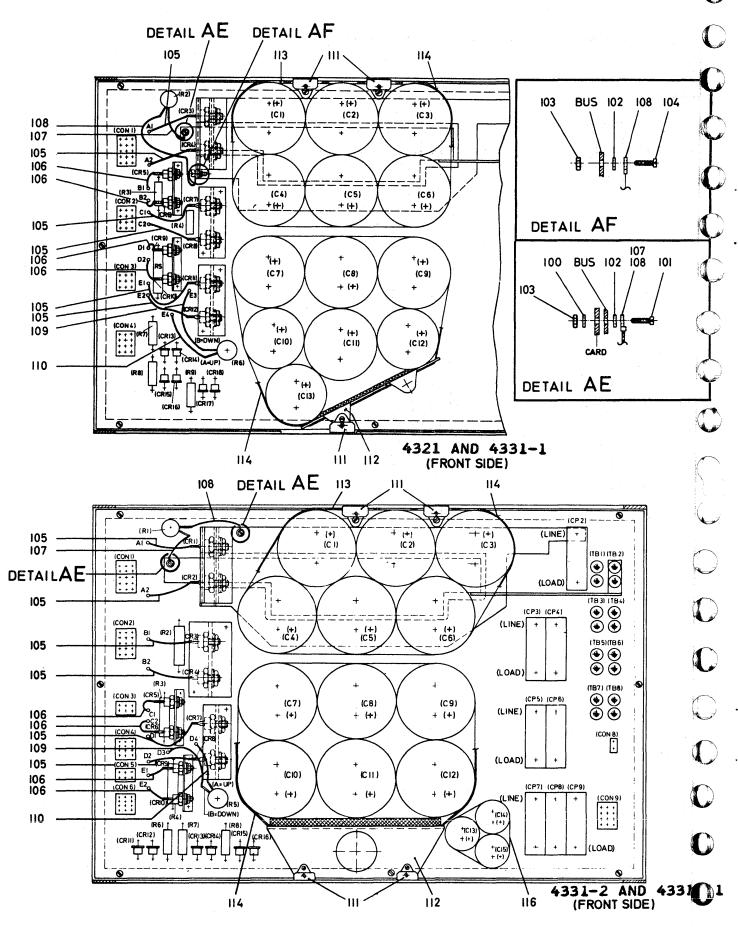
POWER SUPPLY ASSEMBLY,PS 102 (SHEET 3 OF 3,INDEX NO. 100 THRU 116)
